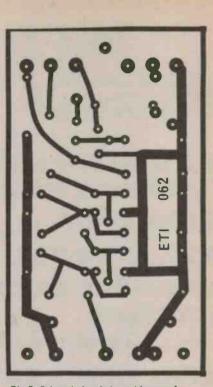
Printed circuit board layout for the tuner. Full size 90mm x 50mm.
